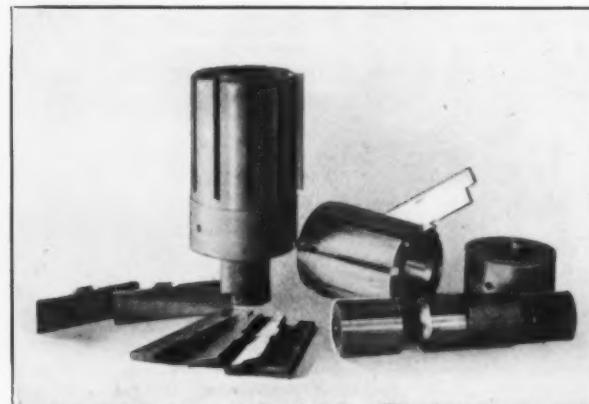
An Assembled and an Unassembled Jig Used for Grinding Reamer Blades.
